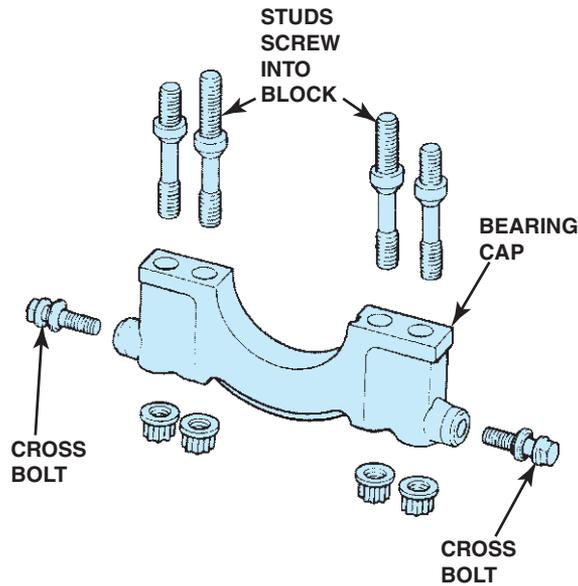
Some engines add to the strength of a four-bolt main bearing cap by also using cross bolts through the bolt on the sides of the main bearing caps.
